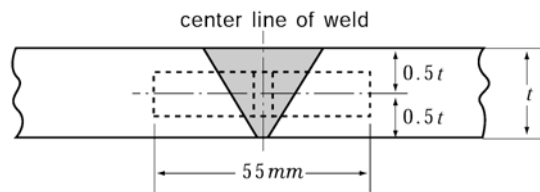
Position of Butt Weld Impact Test Specimen
